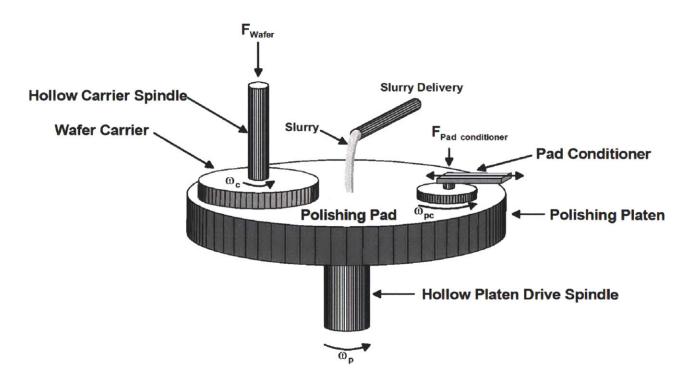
Schematic view of a rotary type CMP tool [18].
